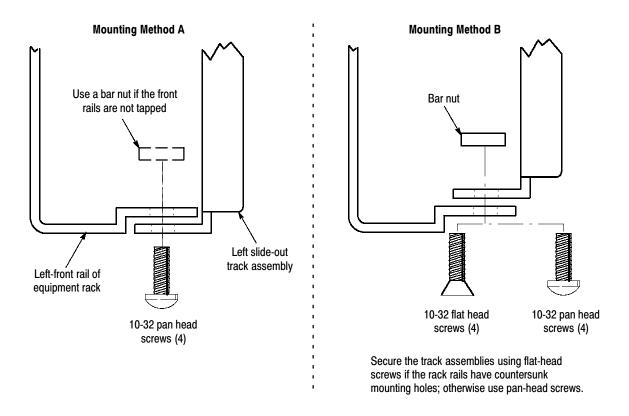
Installing the slide-out track assemblies into the equipment rack (top view)
